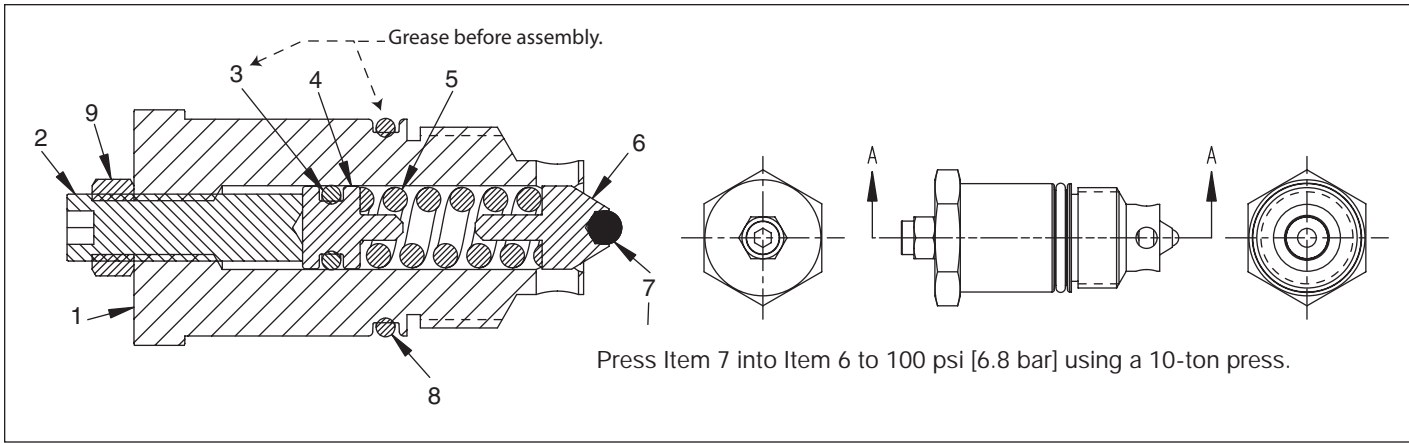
, DC5139900SR, User Adjustable Relief Valve Assembly
